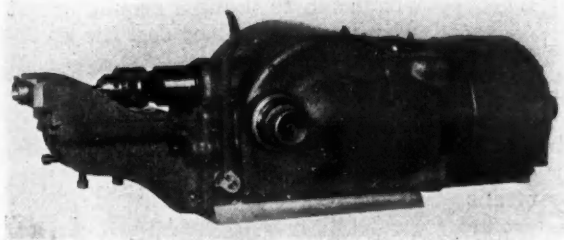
The automatic head is the heart of any unit type machine. This head is a self-contained mechanism with independent drive and feed
